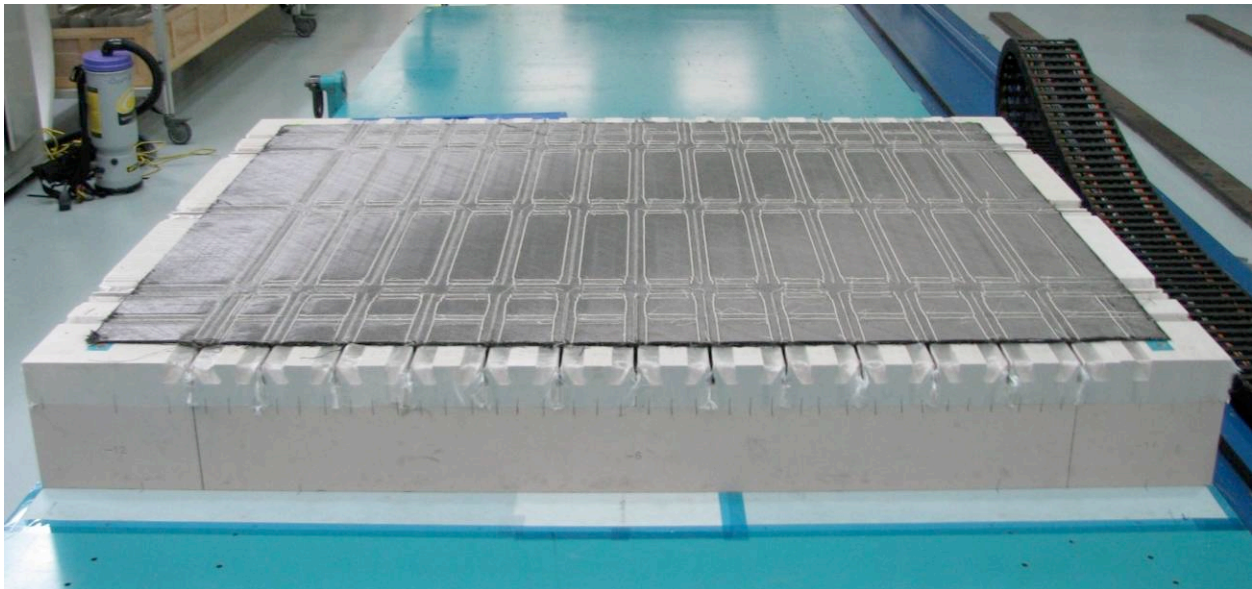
Outer Rib Preform Assembly – Stitching Complete
